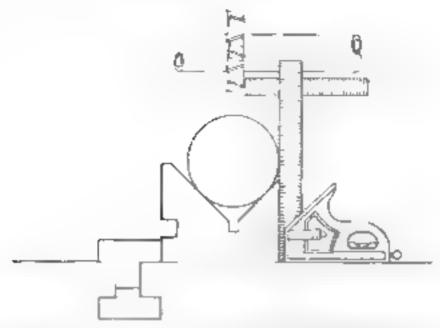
Using a rule and a square to position a double side milling a device in the center of a shaft in preparation for milling a keyseat.
